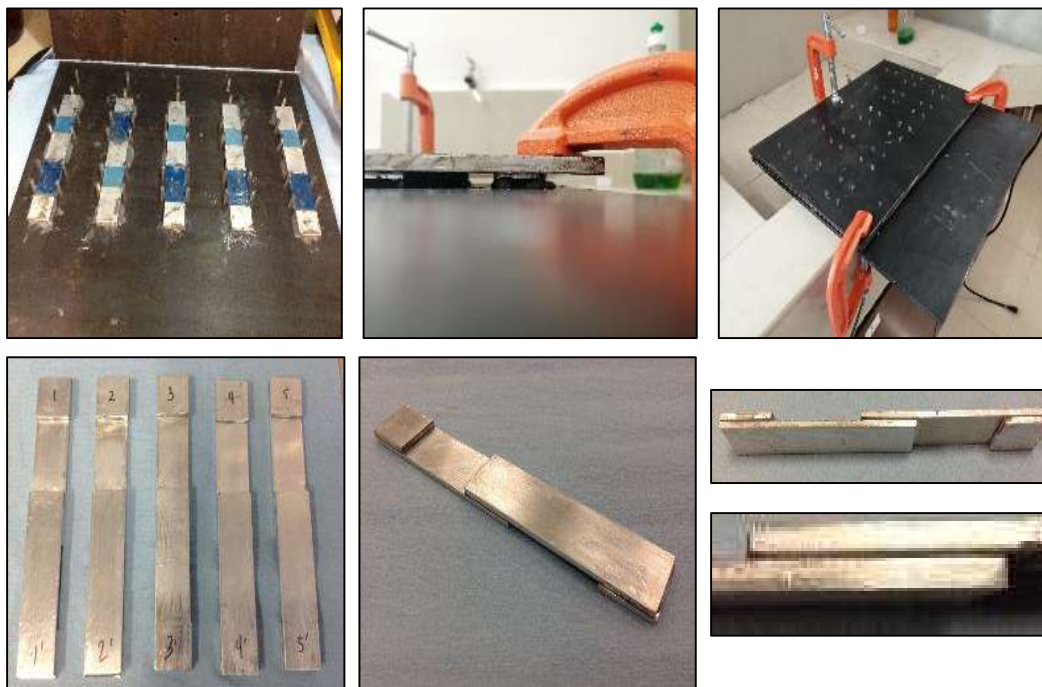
Special steel mold design, manual grips for uniform pressure and final SLJ specimens.
